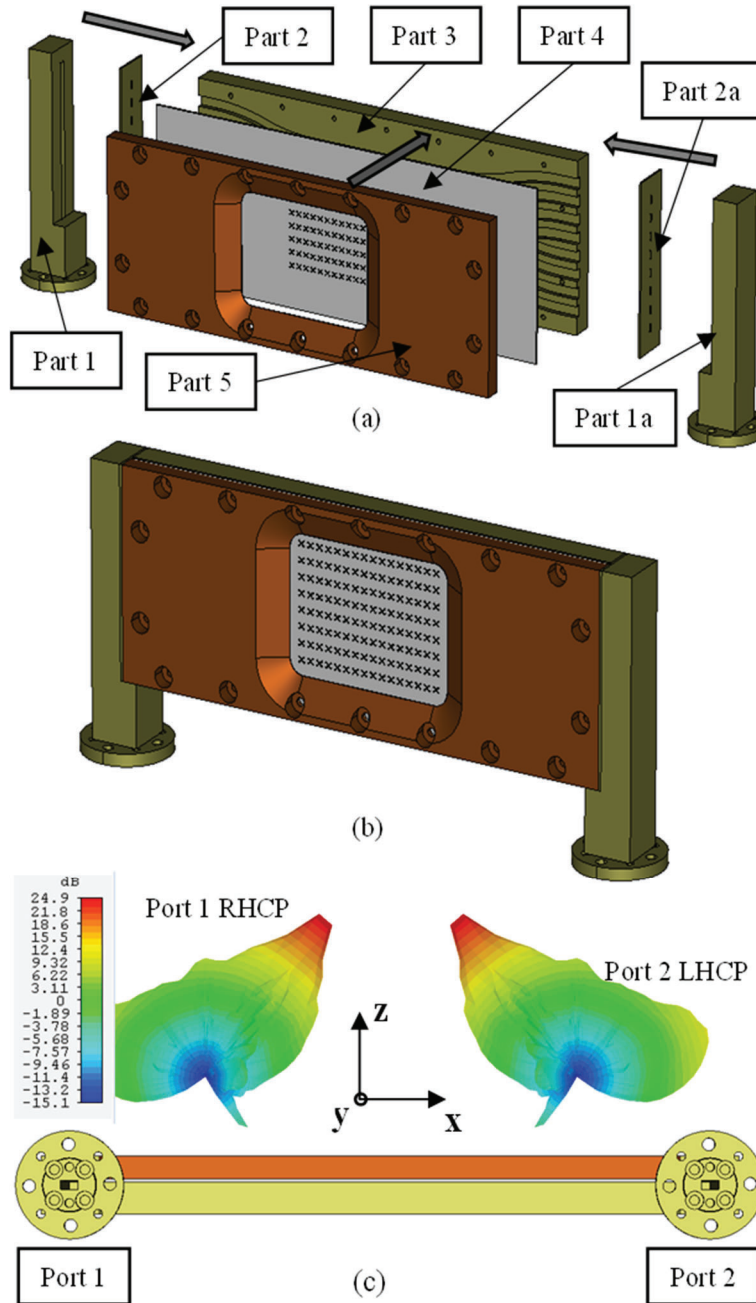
The Full Array Design (a) Disassembled, (b) Assembled, and (c) Radiation Pattern for Each Port
